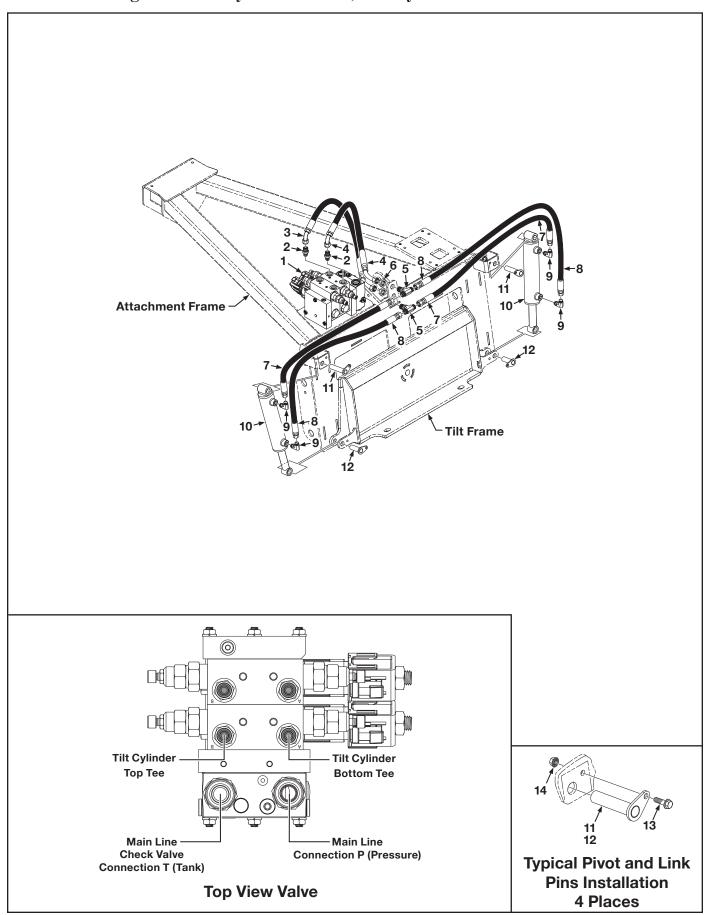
Hydraulic Valve, Tilt Cylinder & Related Parts
